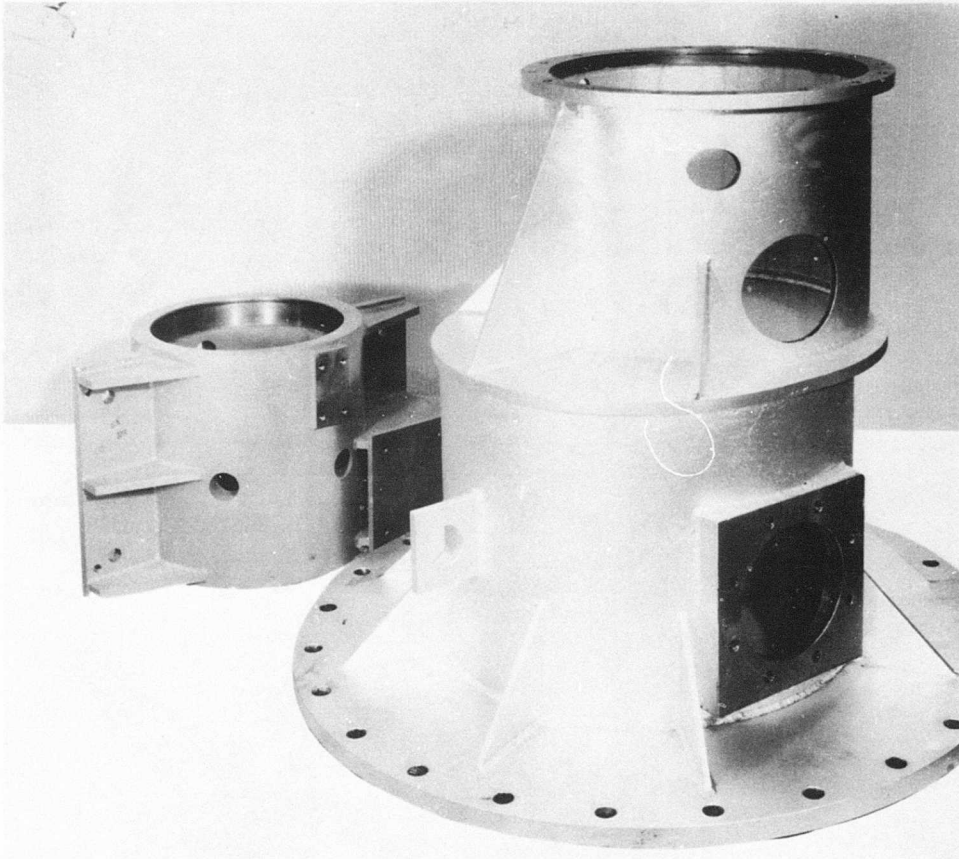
Casing for Mounting High-Speed Gear and Test Vehicle.
